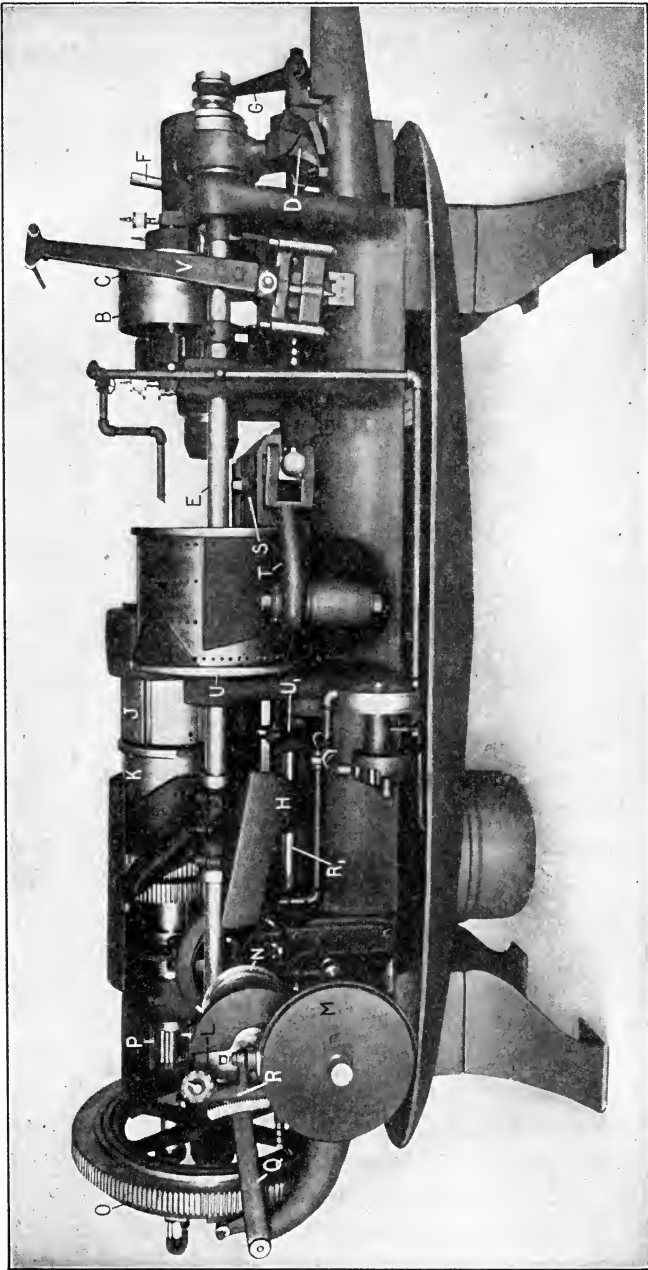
Rear View of the Cleveland Automatic Screw Machine
